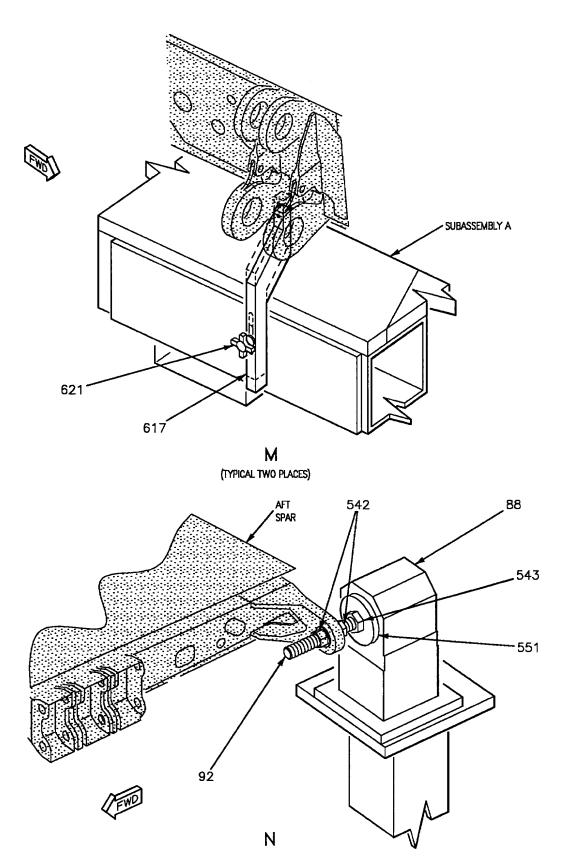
Inner Wing Attach Lugs (Sheet 8)
